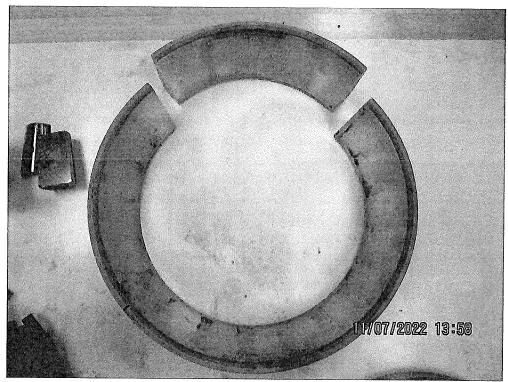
Close-up of a cover after mild cleaning which showed localized corrosion at roller locations.
